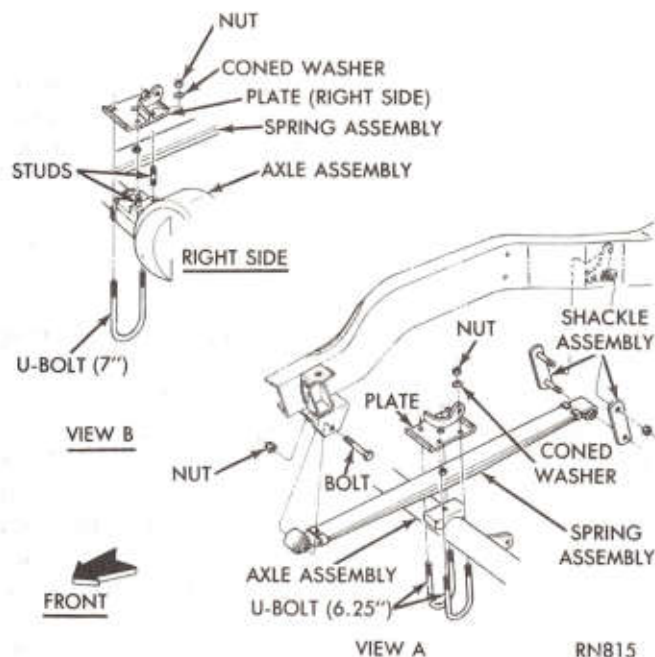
Front Suspension (Spicer 44 Axle) W150, W250, W350, and AW150
